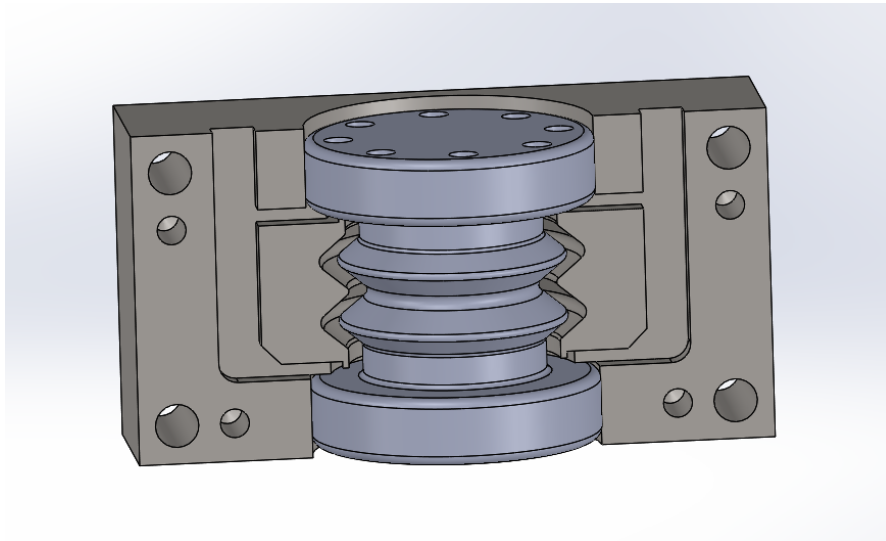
Casting mold for the prism's flexible silicon shell, comprising two mirror-symmetrical parts and a rotationally symmetric (excluding the ventilation holes) core. One mold part is omitted to reveal the interior.
